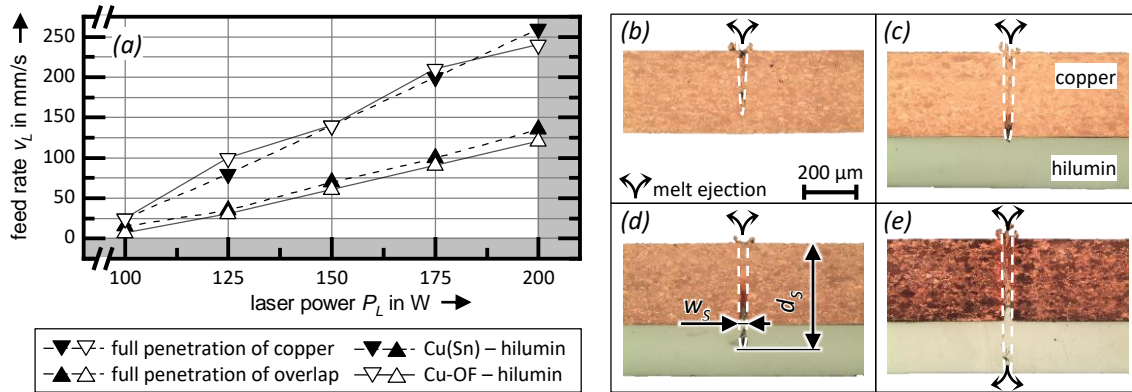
(a) Parameter limits for full penetration of the upper sheet and the overlap in Cu(Sn)/Cu-OF – hilumin joints using WF0, (b) a weld seam not fully penetrating the copper and with melt ejection, (c) starting penetration of the hilumin, (d) a sufficiently deep weld seam with the measured seam geometry values (seam depth  $d_s$  and joint width  $w_s$ ) and (e) full penetration of the overlap with melt ejection on both sides
